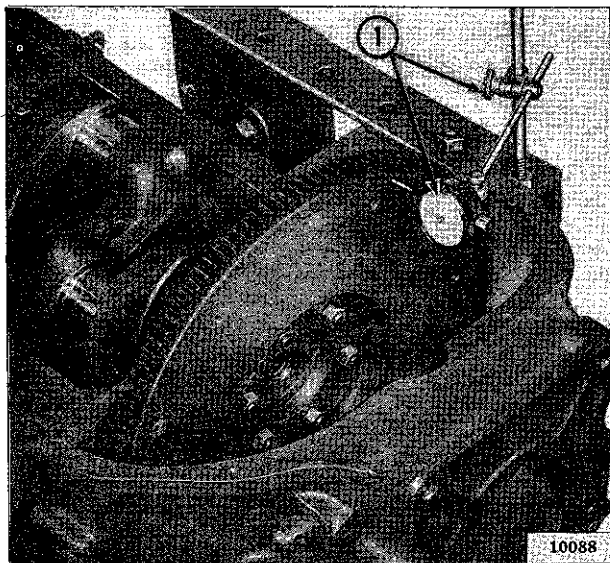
CHECKING FLYWHEEL RUN-OUT
